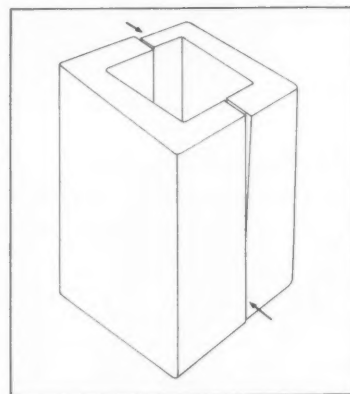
Misalignment of the two mould halves produces the effect here seen, greatly exaggerated. The inner faces, formed by a core, are free from the defect
